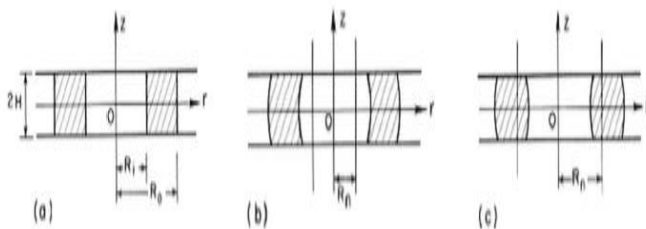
a. specimen before ring test, b. specimen with lubrication after ring test, and c. specimen without lubrication after ring test
